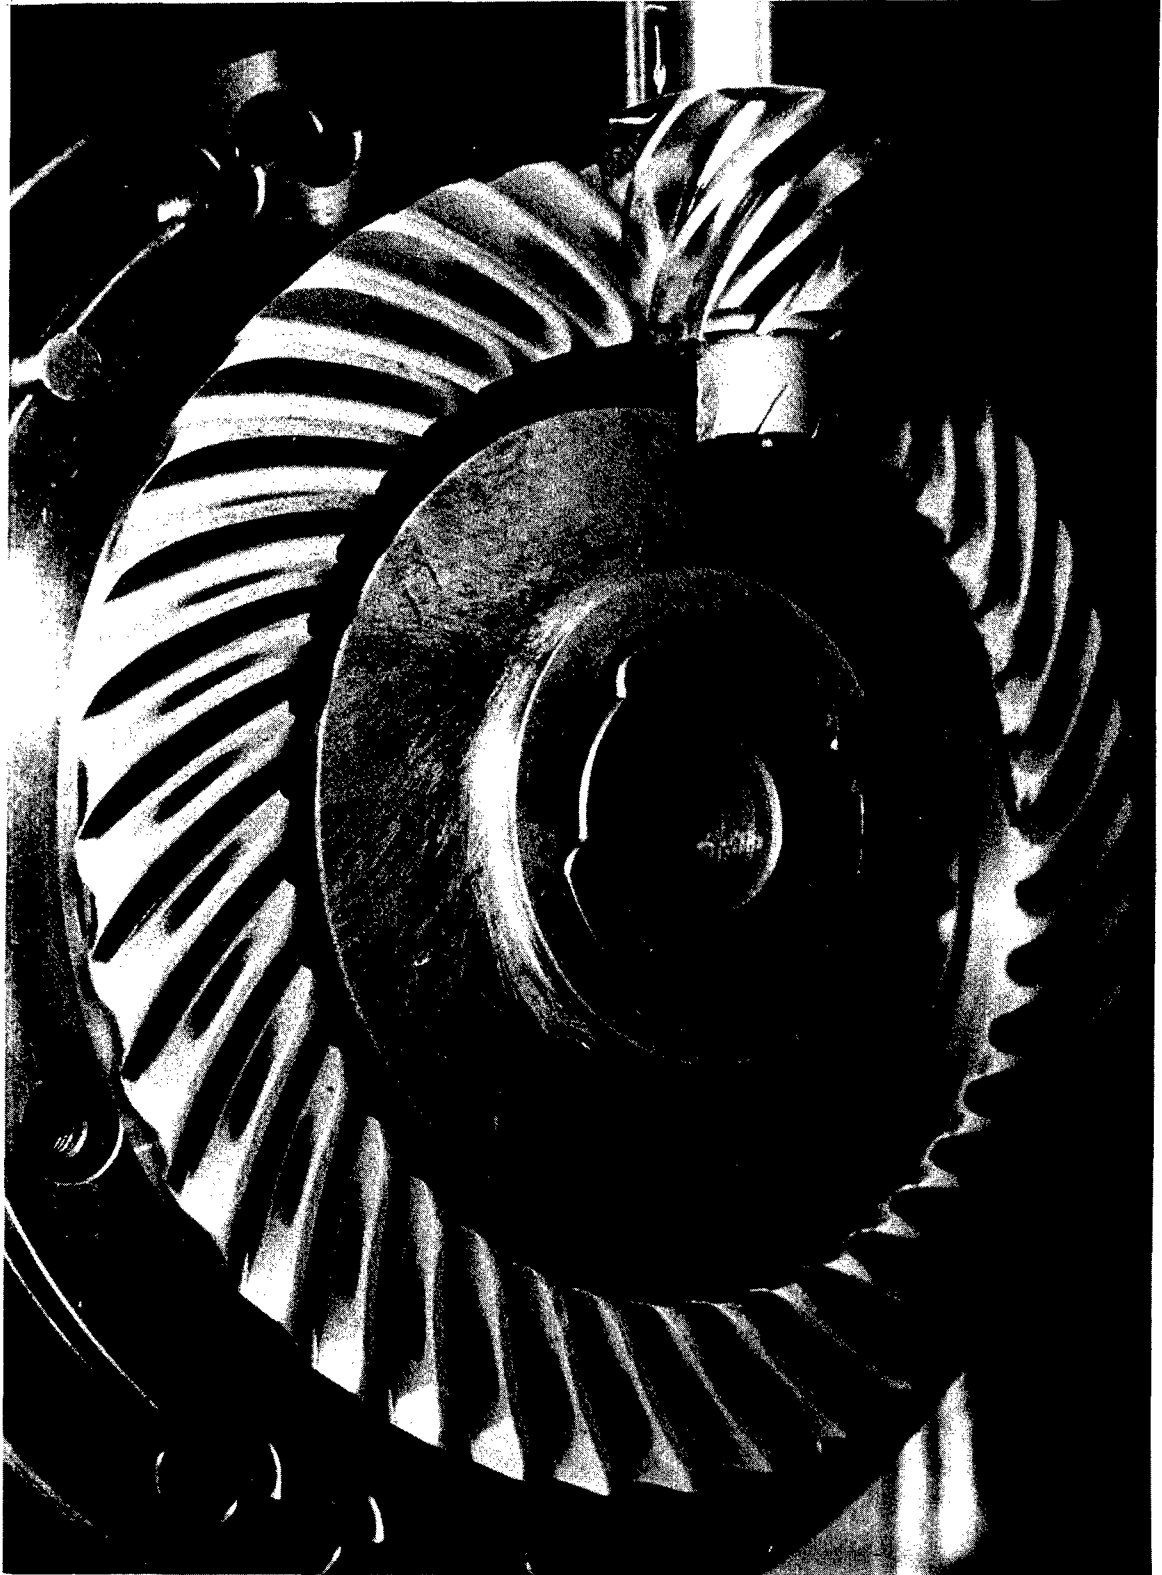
Contact Pattern (of Finish Machined Near-Net Forged Gear) Shown by Dark Areas at Tooth Surfaces
